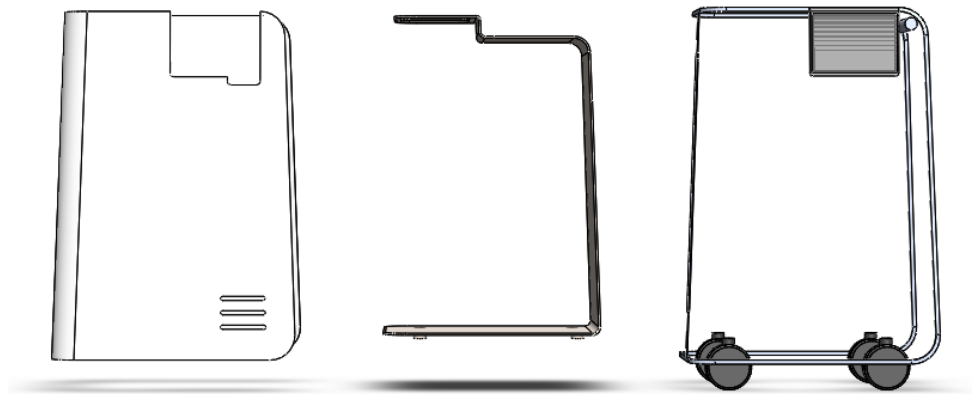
CAD of the final concept. Left: Outer metal sheet. Middle: Inner metal sheet. Right: Edge, LED strip, screen, handle and wheels.
